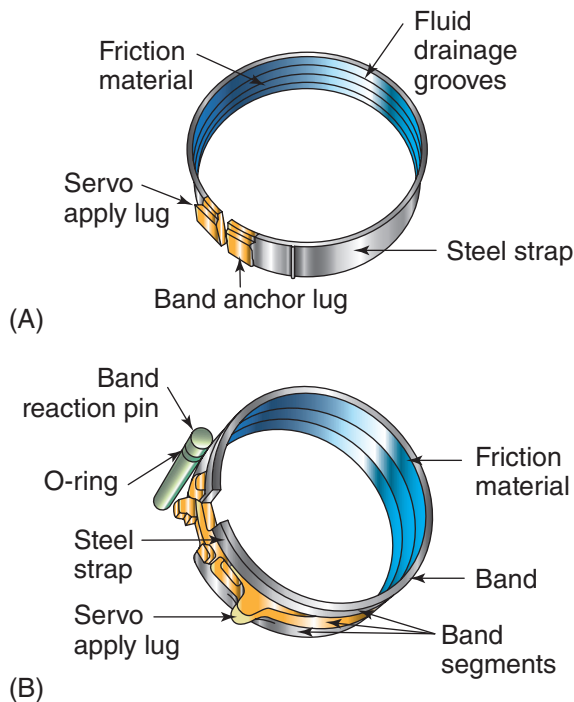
(A) Typical single wrap and (B) double wrap transmission band designs.
